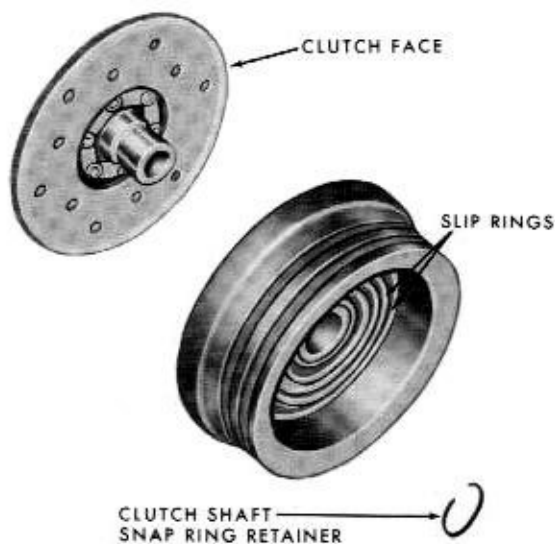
B-2—Electrically Operated Clutch—(61LT-8809)
